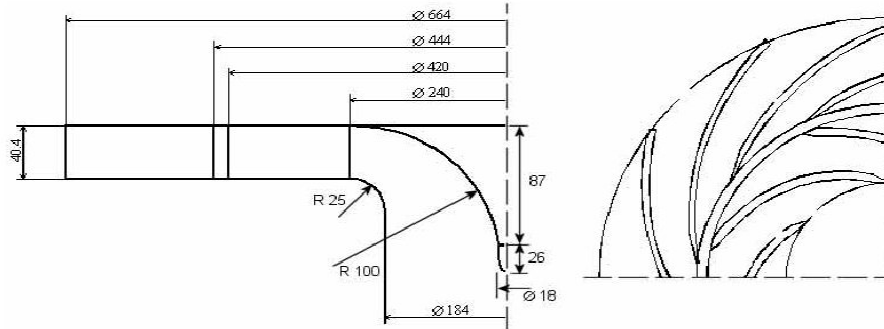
Impeller and vaned diffuser geometry (Image taken from Ubaldi et al. [4]).
